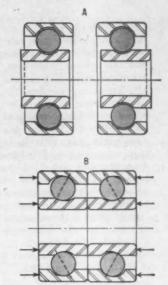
A pair of bearings for one end of a gyro rotor shaft A) before preloading, and B) after preloading.
